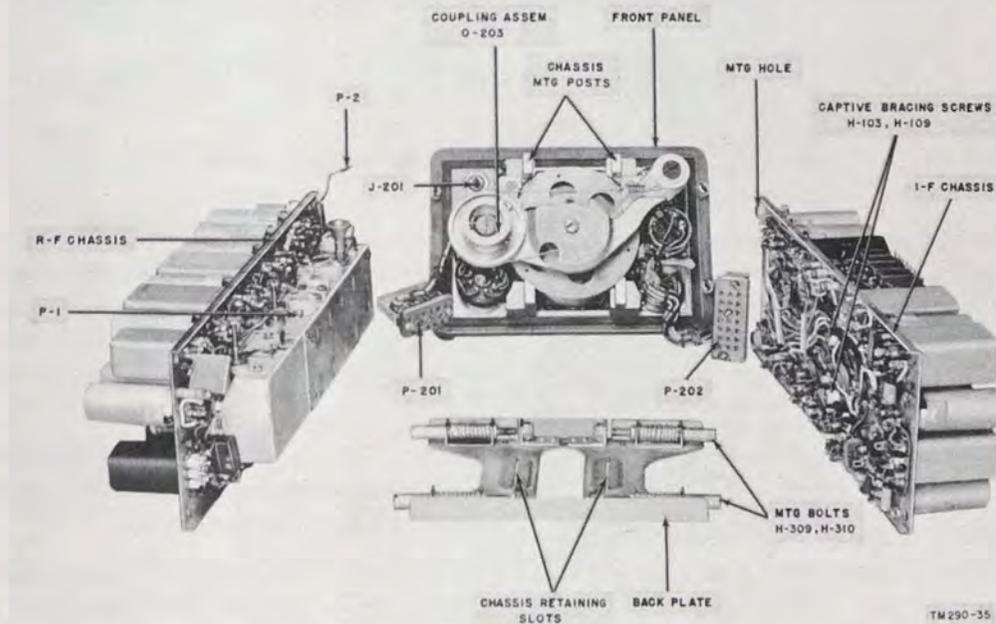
Receiver-Transmitter RT-70/GRC, disassembled view.
